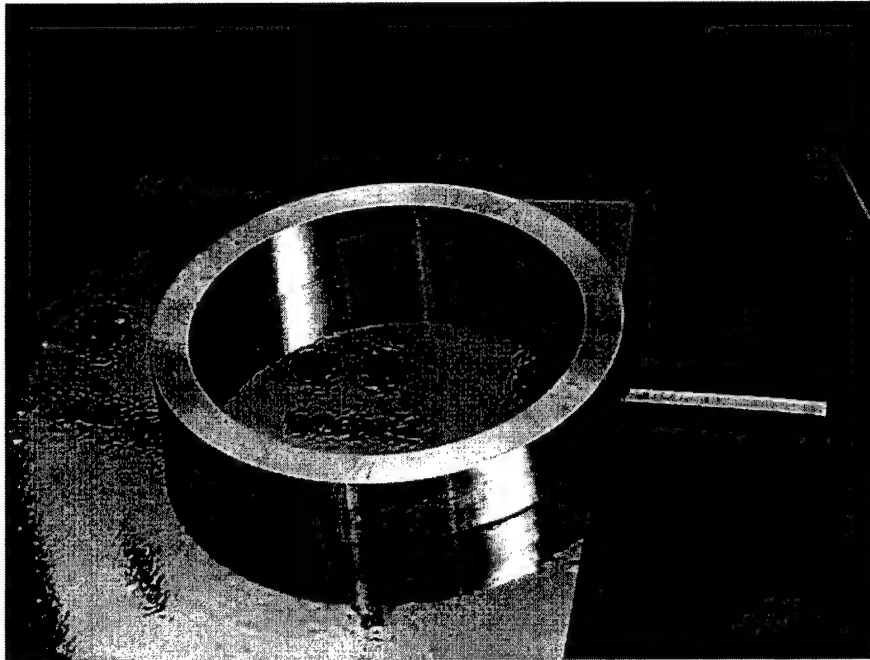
Mounting Ring Bonded to PVDF Layer
